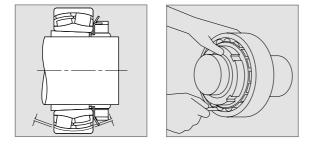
Checking bearing clearance with bearing mounted on shaft.
